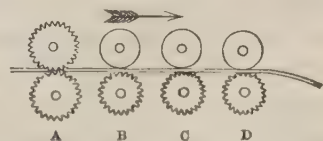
ARRANGEMENT OF ROLLERS IN THE DRAWING FRAME.
